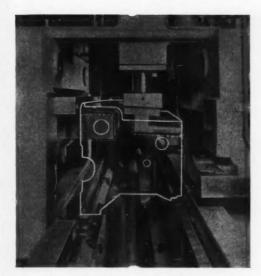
General view of part of a large in-line Cross transfer machine which has been supplied to a well-known Europeanmotor car manufacturer for performing multiple operations on 4-cylinder blocks
